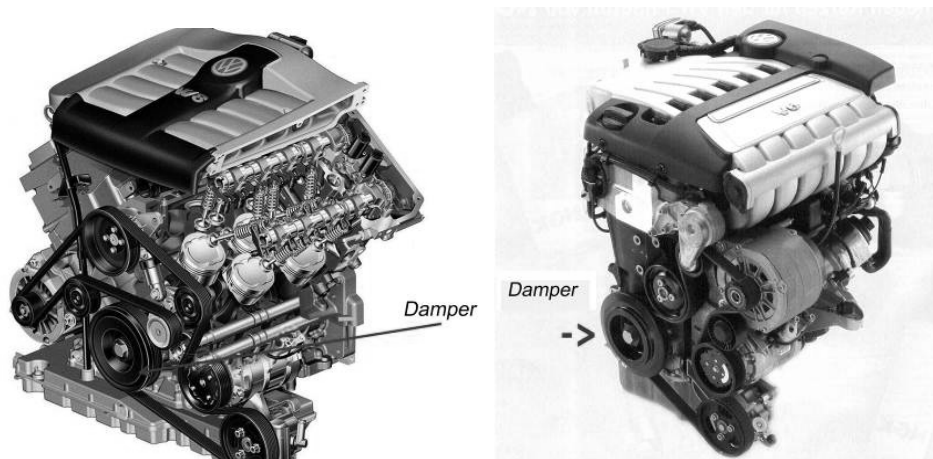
VW brand motor-car engines with torsional vibration dampers assembled
